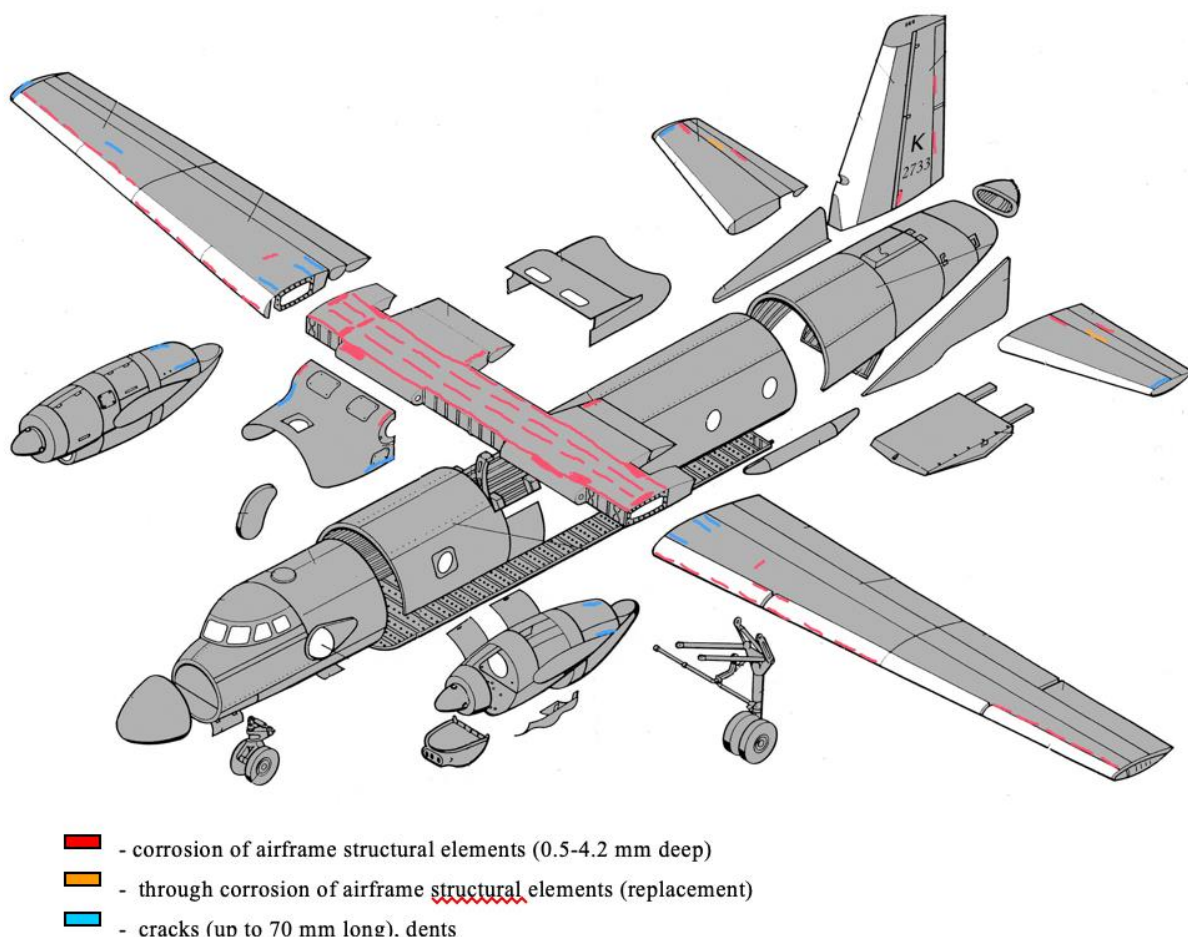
Diagram of corrosion damage and cracks An-32 K-2733 Batch B5
